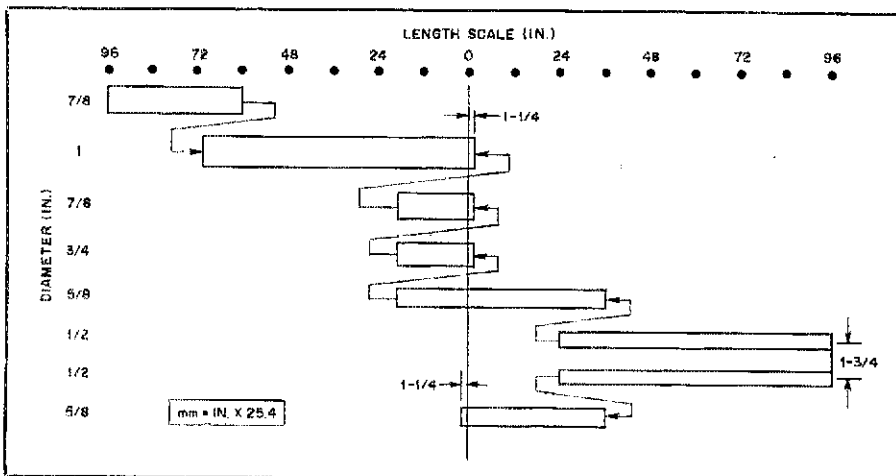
Exploded view of the driven-element tubing, showing diameters and lengths for the various tubing sections.
